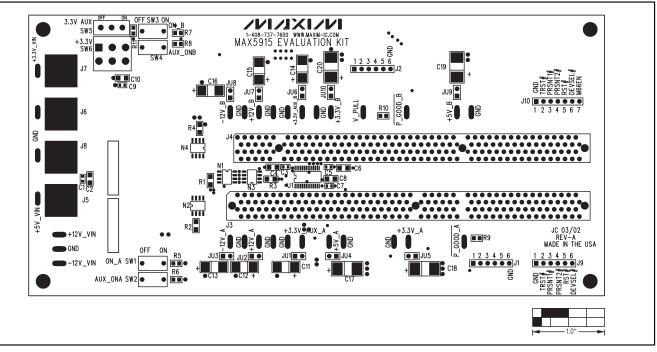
MAX5915 EV Kit Component Placement Guide—Component Side
